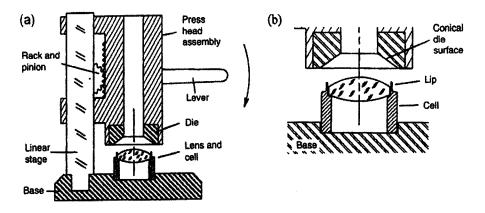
An alternate method for burnishing a lens into a cell using a mechanical press to bend the cell wall without rotating the subassembly. (a) Conceptual view, and (b) enlarged view. (Adapted from Yoder.¹)
